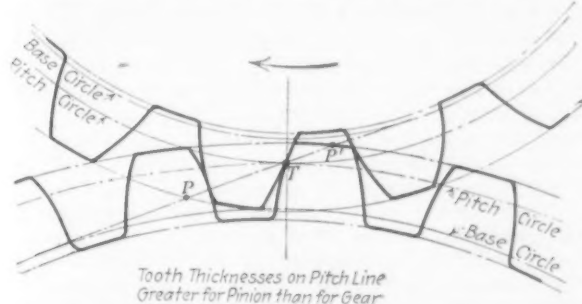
Shows, Like Fig. 15, a 16-Tooth, 20-In. Pinion Meshing with a 32-Tooth, 40-In. Gear, Both Having 0.8 Diametral Pitch, 3.93-In. Circular Pitch and Being 20-Deg. Involute Gears
